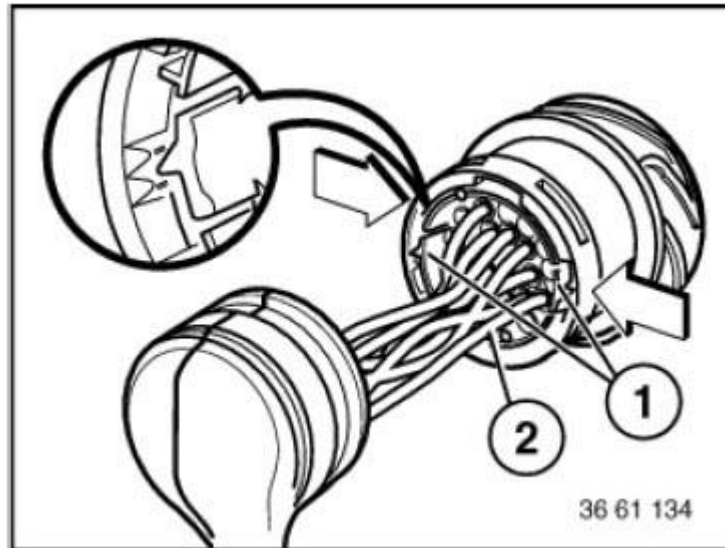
Pressing Contact Retaining Lugs Using Special Tool (61 0 303)
